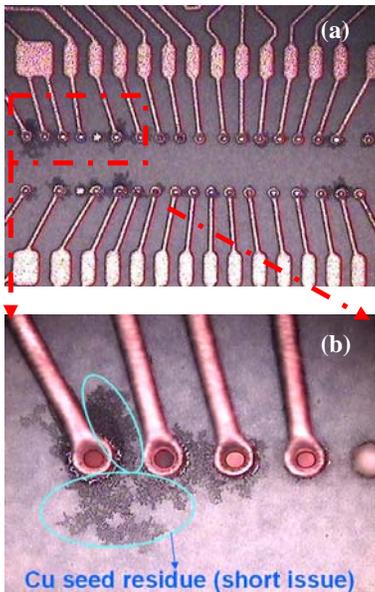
(a) Cu residue after etching, (b) Enlarged view
